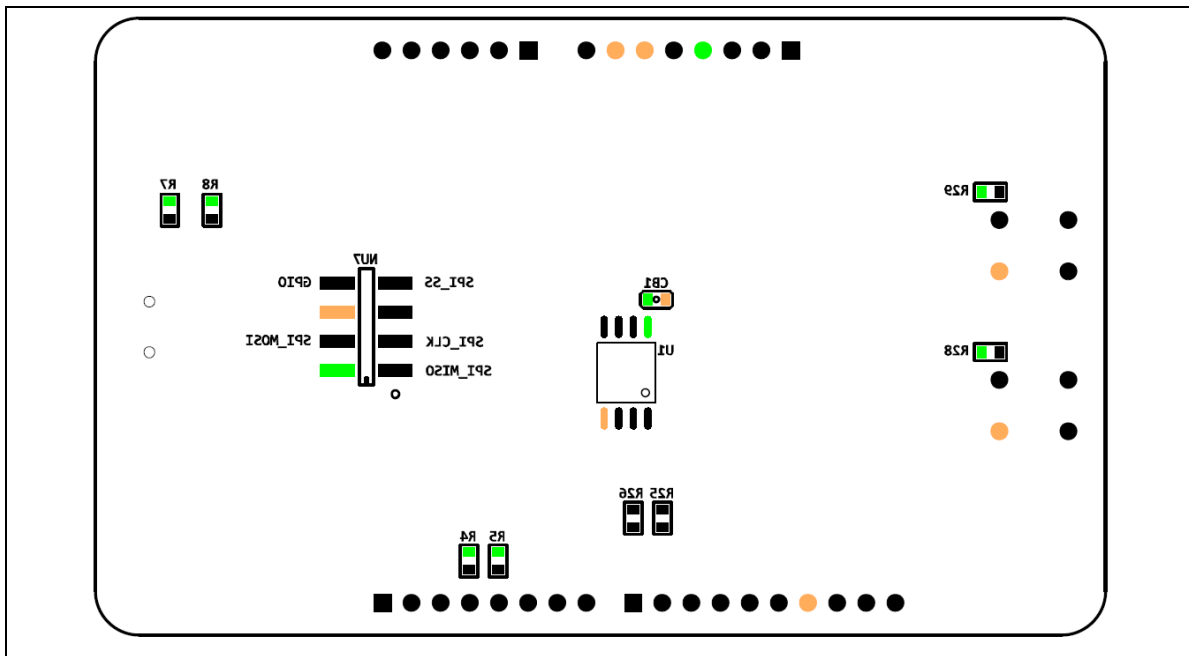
NuTFT-SPI_320x240 Daughter Board Placement - Back View
